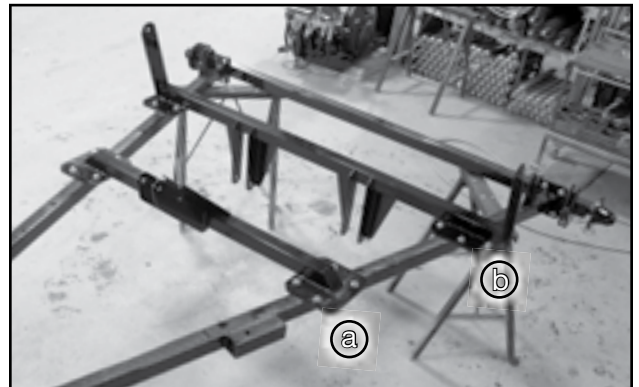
(a) Mover kit cylinder mount, (b) steering wheel tube
